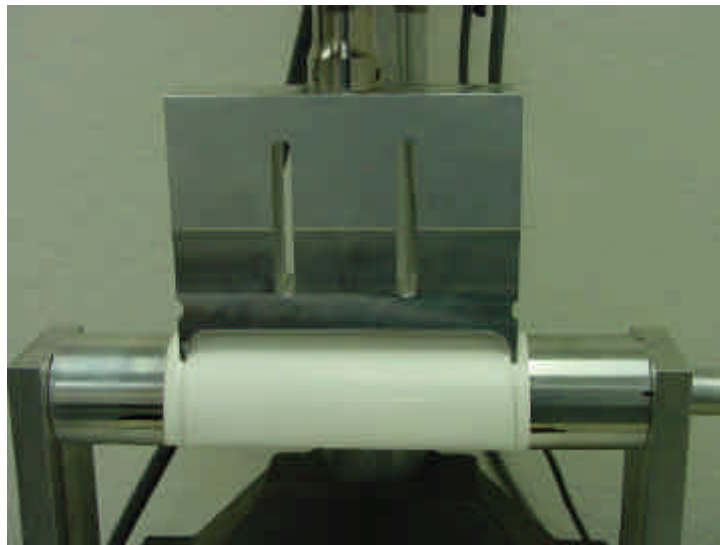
Formation of the Circular Membrane leaf by Ultrasonic Welding
